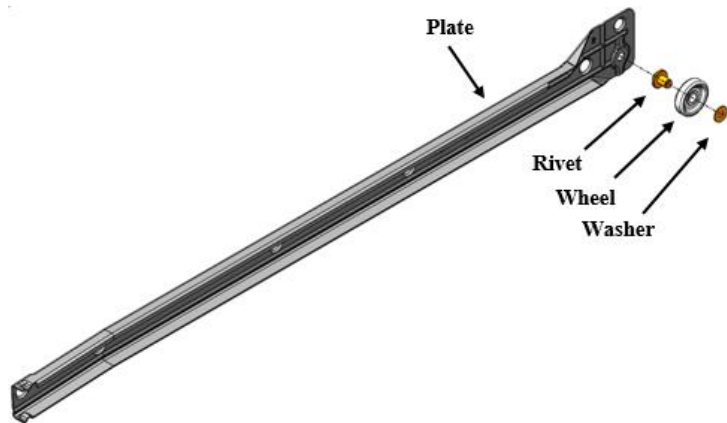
A roller slide consisting of a plate, a rivet, a wheel and a washer.
